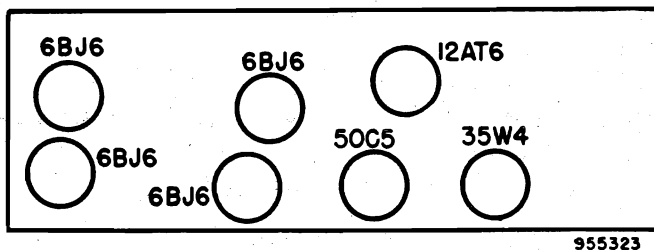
TUBE LOCATION DIAGRAM FOR CHASSIS 120125-B
